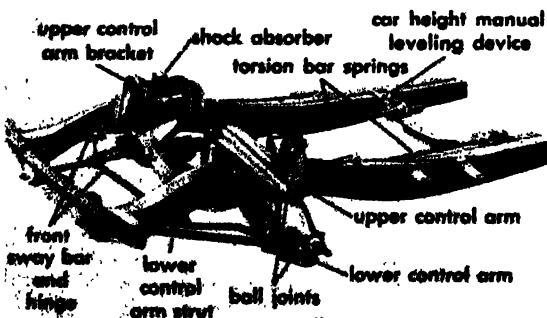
Torsion-bar suspension for front wheels. (Chrysler Corporation)
